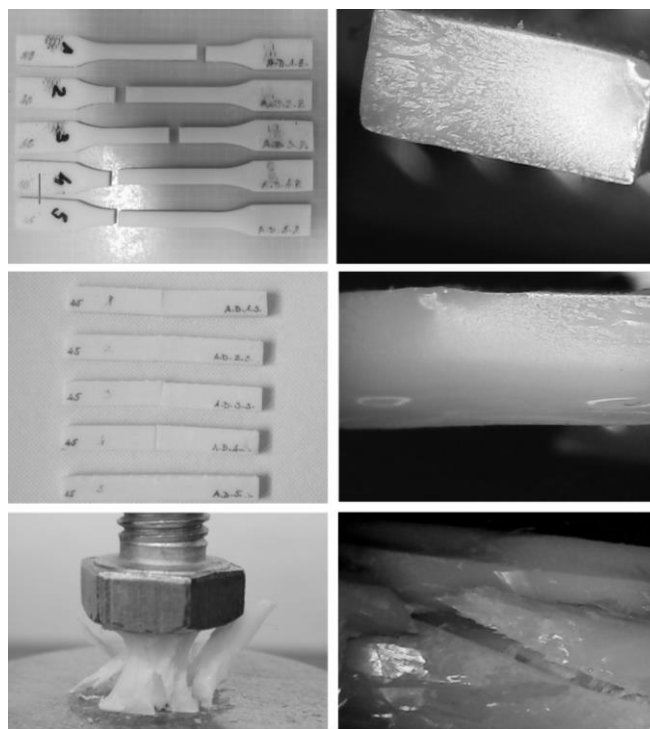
Left: broken DLP printed specimens; right: fractured surfaces after tensile (first row), three point bending (second row), and compression (third row) testing.
